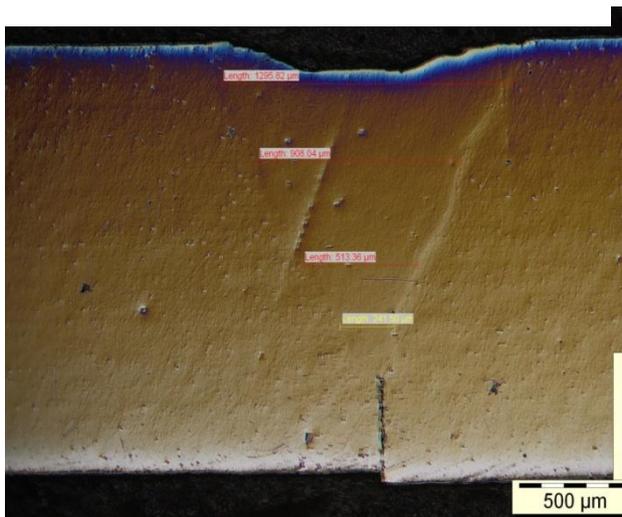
(e).optical image of weld bead at 330 watt power and 170 mm/min speed.
